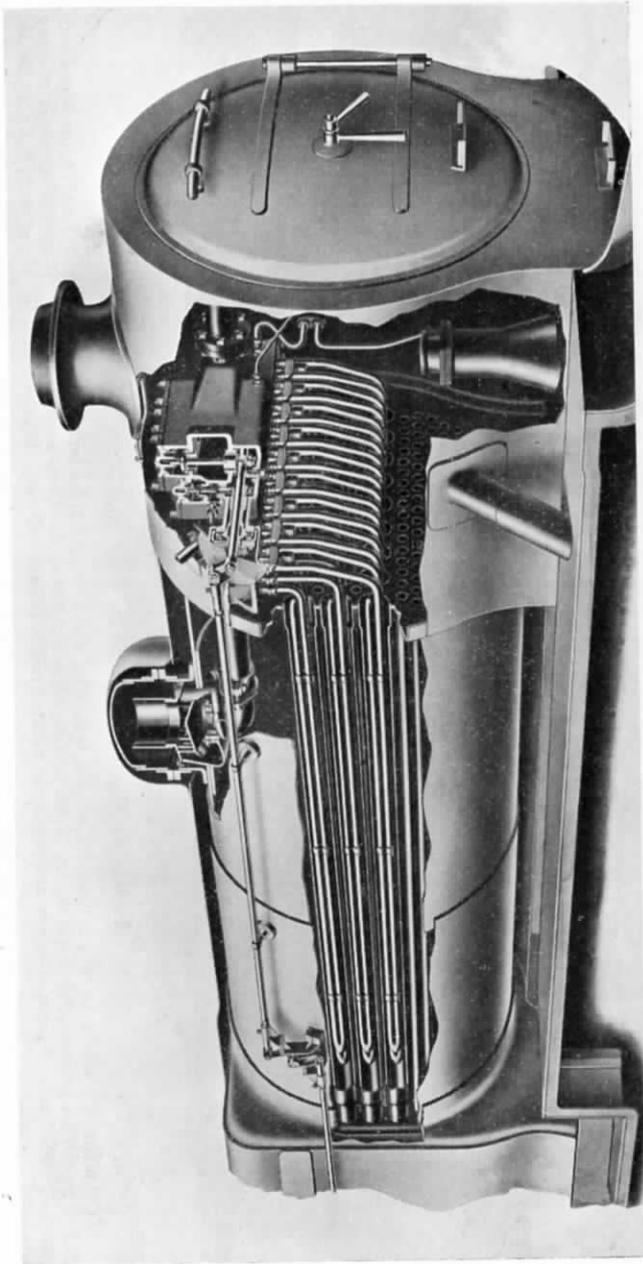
LOCOMOTIVE BOILER SHOWING "MELESCO" SUPERHEATING APPARATUS AND TANGENTIAL STEAM DRYER.
